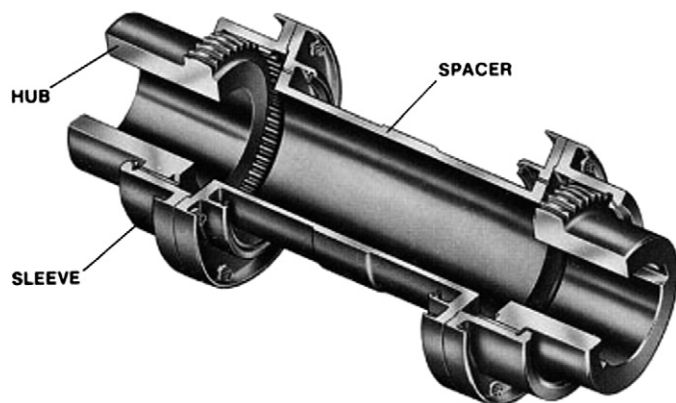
• Continuously lubricated gear type coupling with spacer (Courtesy of Zurn Industries)
